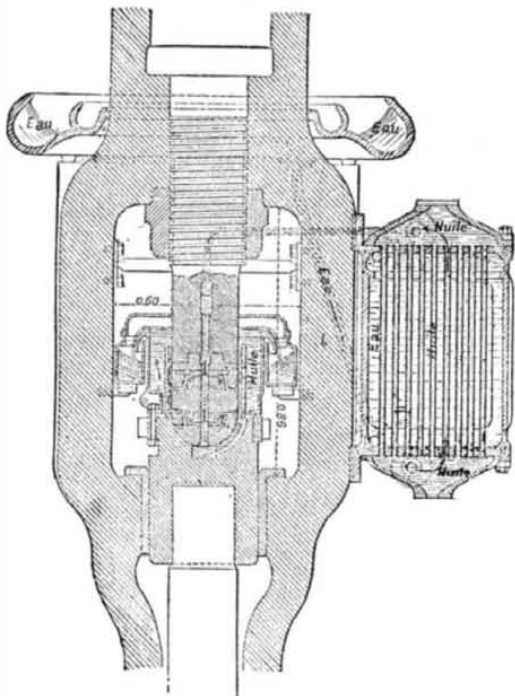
FARCOT'S ARRANGEMENT FOR COOLING THE LUBRICATING OIL OF THE PIVOT.
